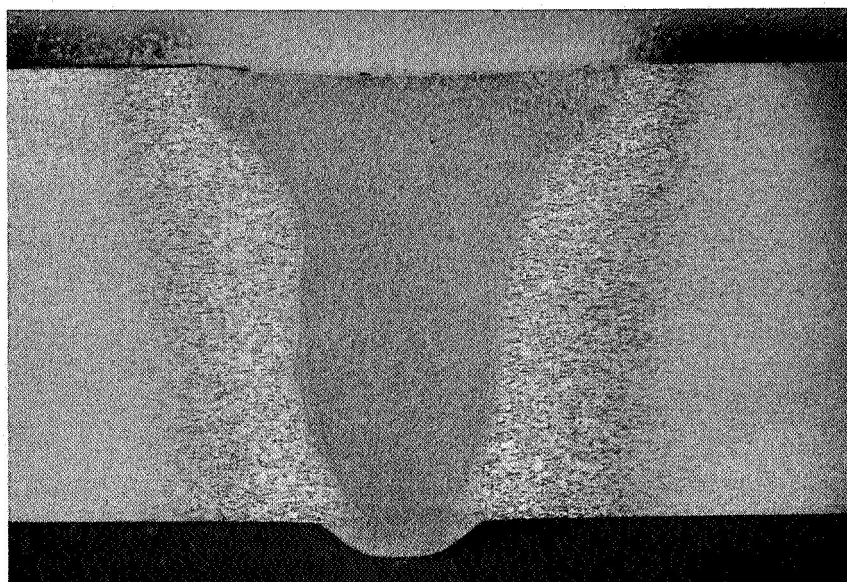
Out-of-Vacuum Electron Beam Weld in
